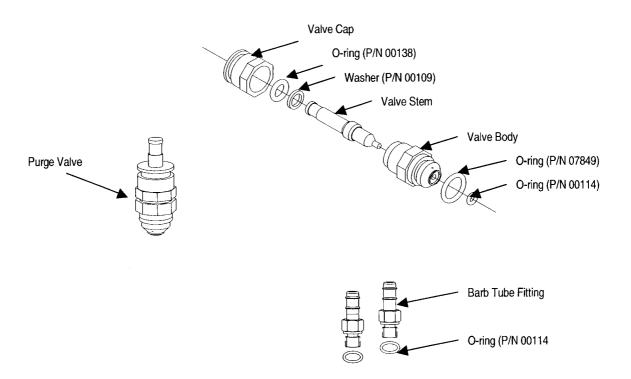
Purge Valve Assembly (P/N 10180) & Barb Tube Fittings (P/N 00575)
